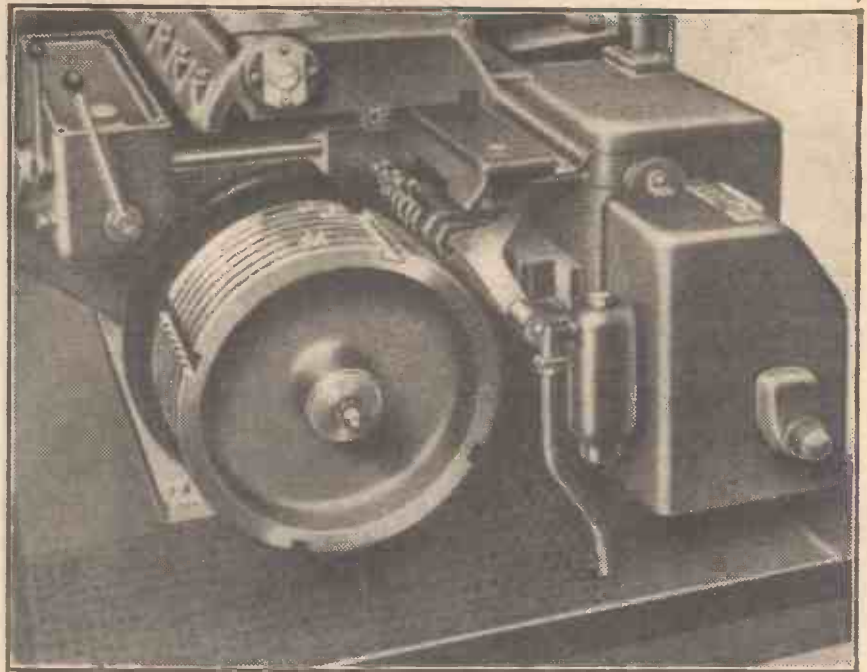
End view of the lathe, showing the self-selecting feed motion.
